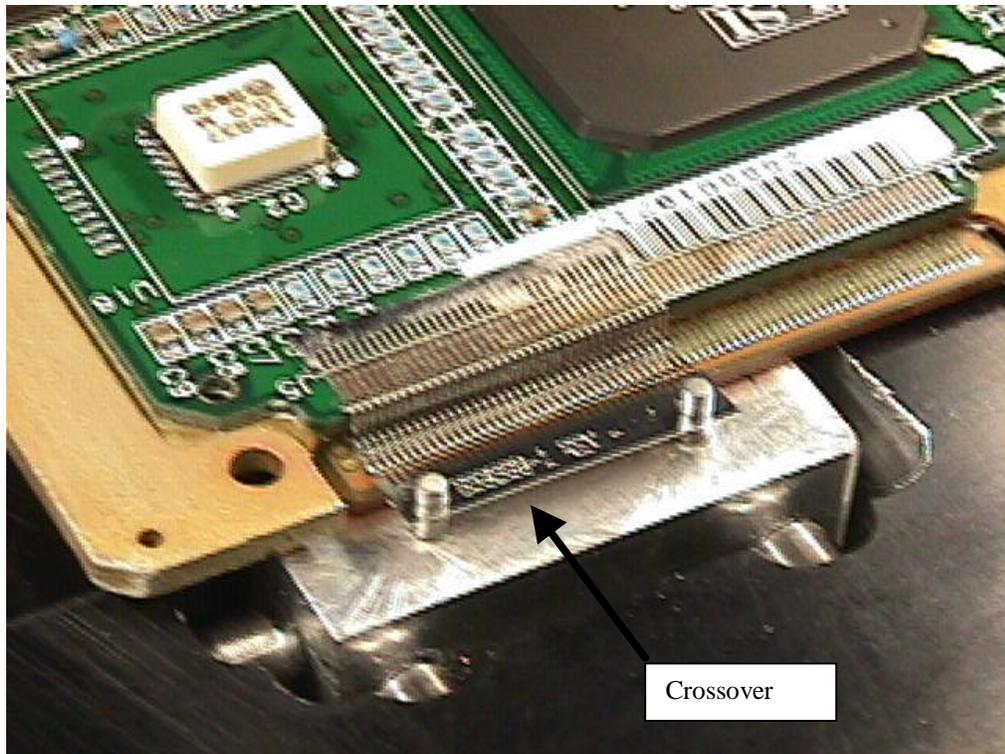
ToddCo Hot-bar Fixturing
